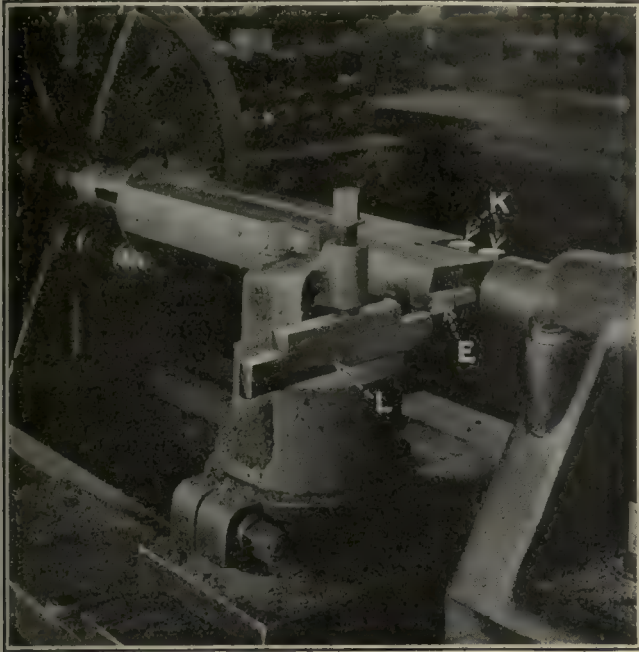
BORING HEAD ON CENTERS READY FOR ASSEMBLING
